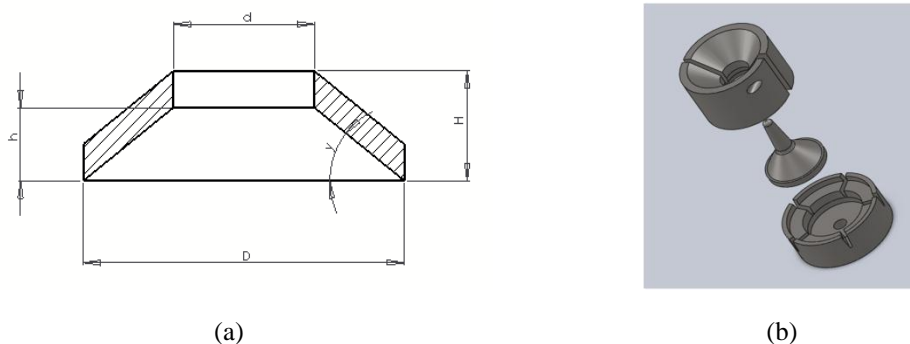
(a) Dimensional parameters for a Belleville washer. (b) Exploded view, in isometric projection, of the mold components, (Pereira *et al.*, 2010).
